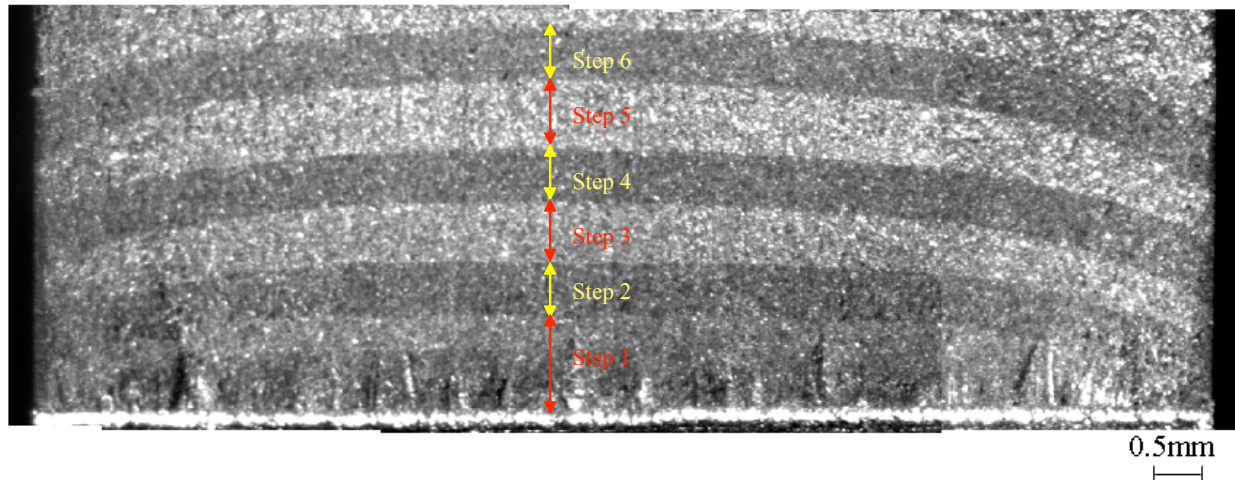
Fracture surface of the CT sample following the fatigue CGR test. Crack extensions produced during each step of the fatigue test under various R (0.1 and 0.5) are identified by the alternating light and dark bands. Crack propagation direction is from bottom to top.
